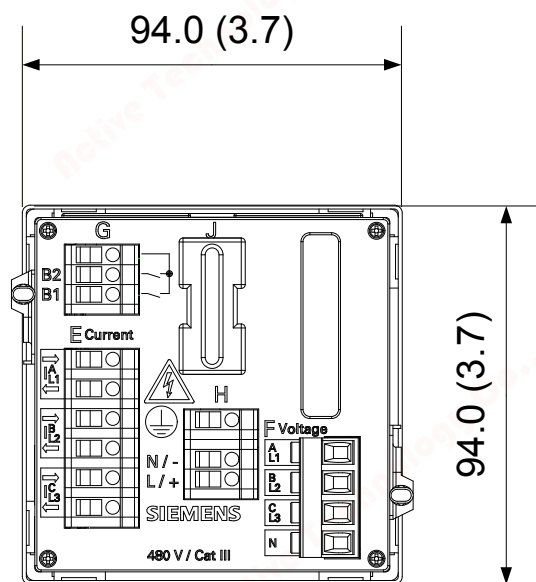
Dimensional Drawing of SENTRON PAC5x00
